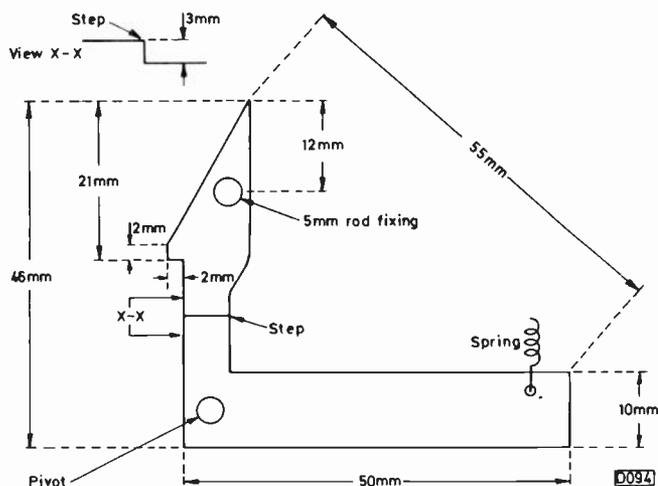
L-shaped crank for holding the drum in the laced position. It may be necessary to adjust on assembly – what has to be done should be clear when the actual machine is on the bench.
